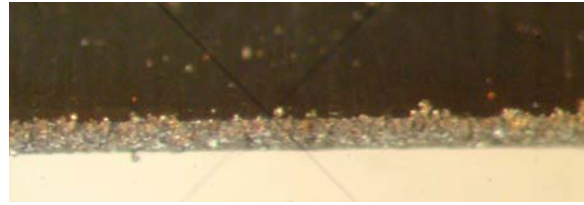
$200\mu\text{m}$ thick stainless steel sheet cut with 40W HM at 1.5m/min
